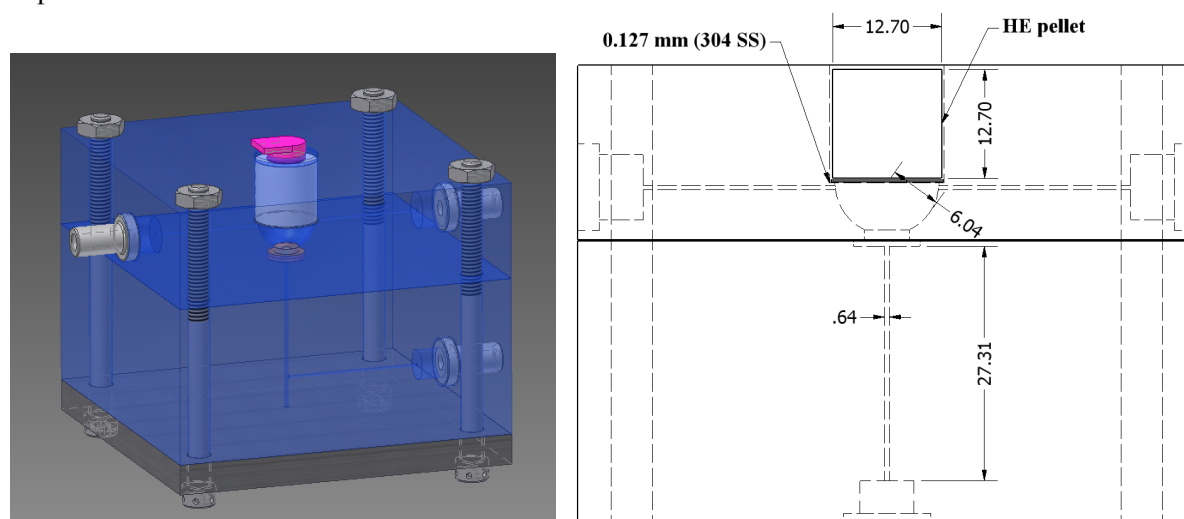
The miniature Voitenko compressor design is shown here with mechanical dimensions in mm. Gas fittings are included to allow gas flow in the hemispherical bowl as well as vacuum access for the lower tube.
